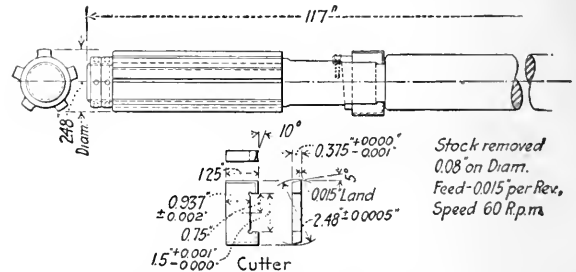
BAR, CUTTER, AND FOLLOWER FOR THE LARGE HOLE
